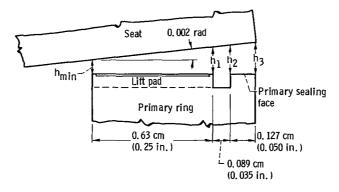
Two-milliradian deformation of seal seat causing nonparallel faces in primary seal.
